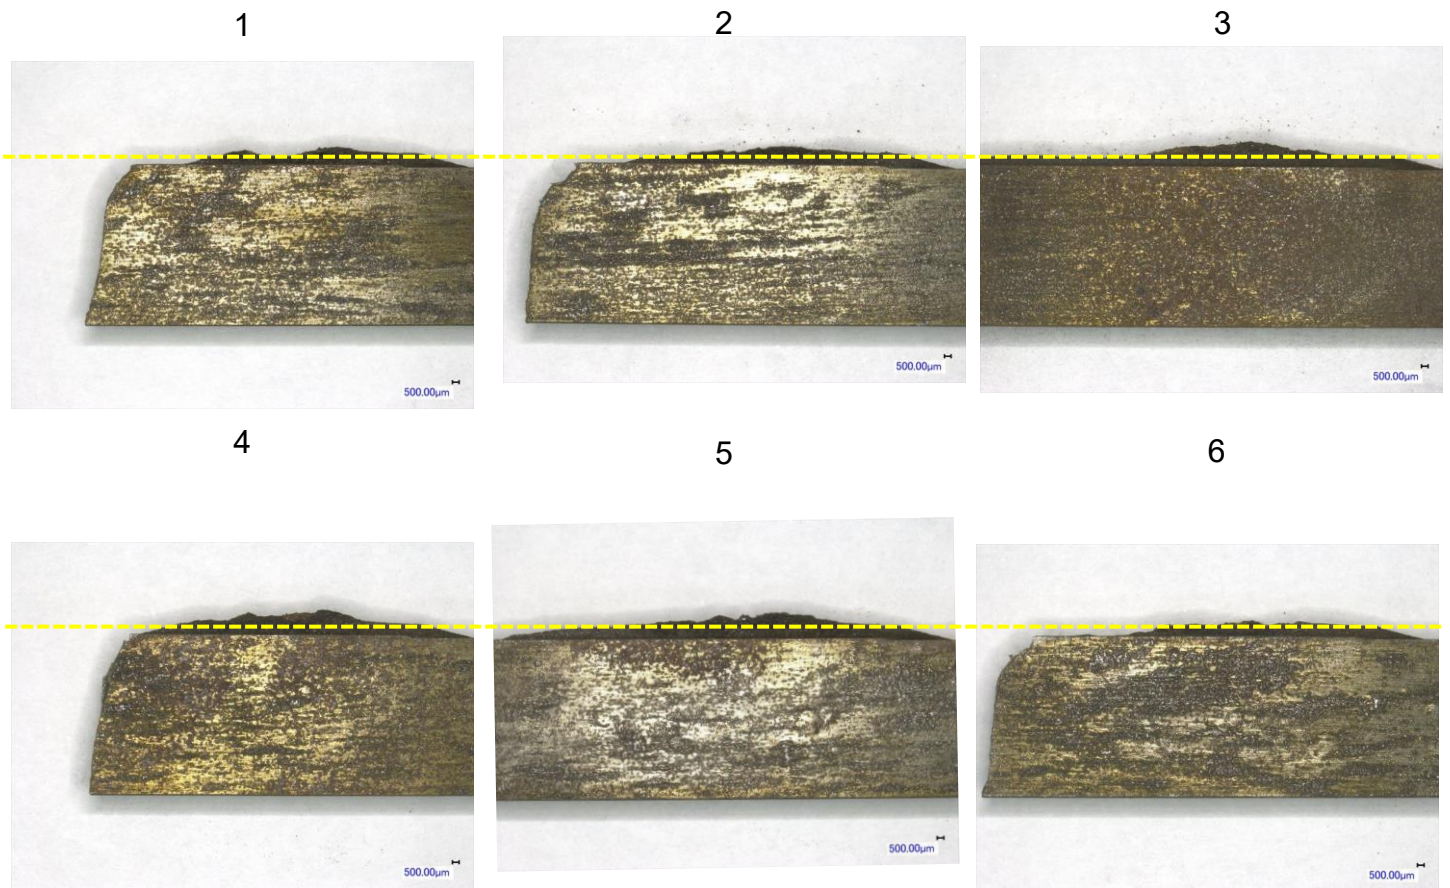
Fracture surface of DCB specimens with the U shaped groove (Mark AB8)
